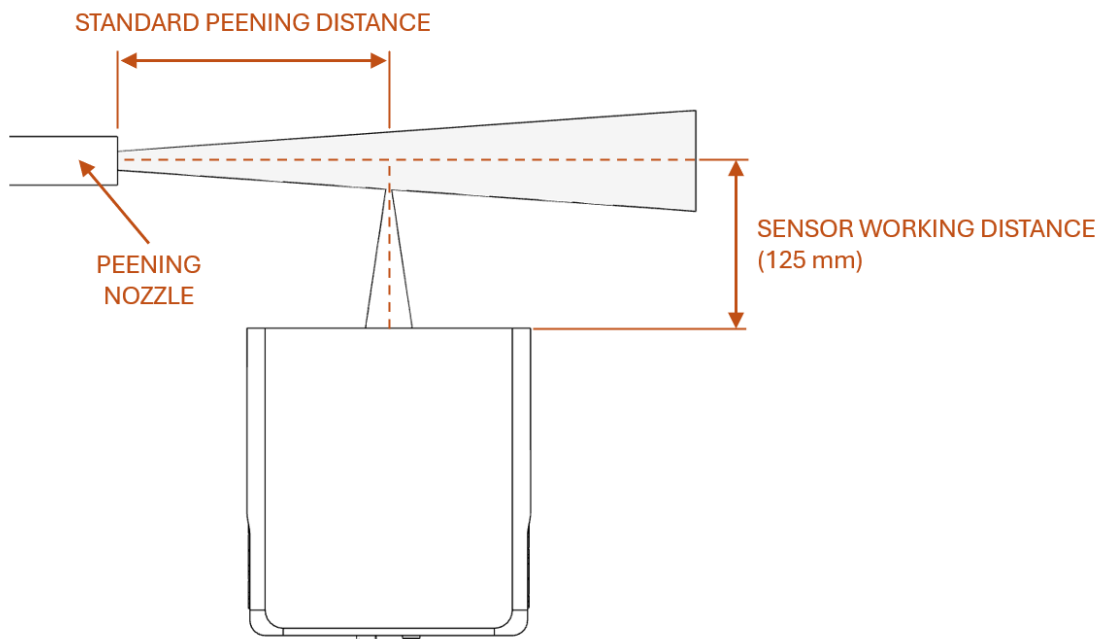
SENSOR HEAD WORKING DISTANCE
